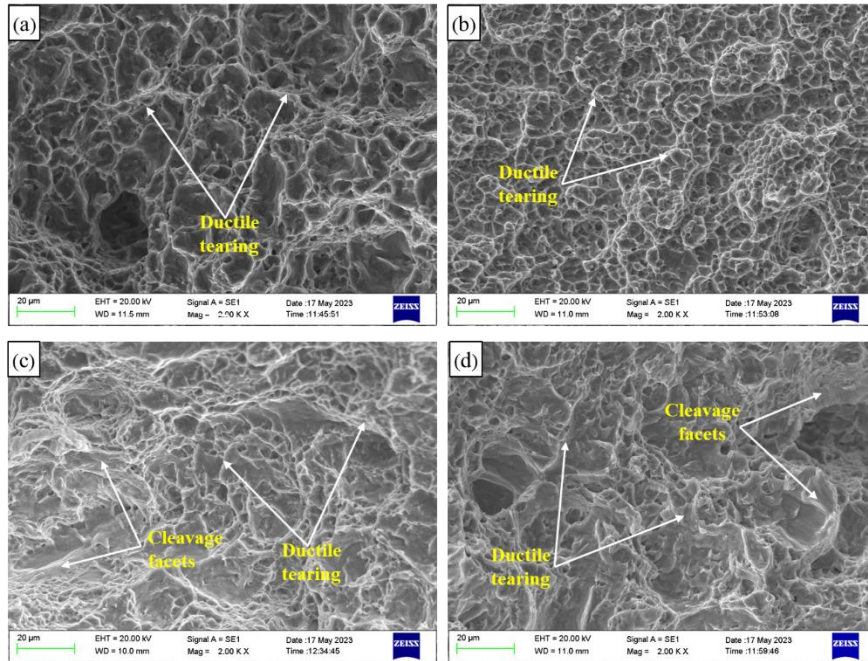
SEM micrographs of fractured full length tensile specimens of as-received base materials and dissimilar welds: (a) as-received CP-Ti; (b) as-received Ti-6Al-4V; (c) welded using conventional-GTAW; (d) welded using pulse-GTAW at 5Hz
